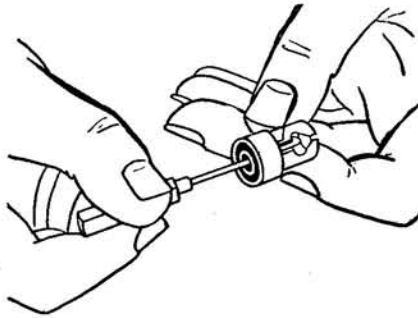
Pressure chamber scraper is used to clean lower pressure chamber and annular groove on top of nozzle.
